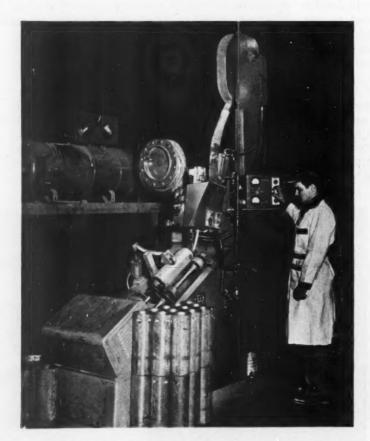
On this automatic machine, which is provided with Lincoln welding equipment, hub flanges are welded inside ends of tubes for winch drums.
